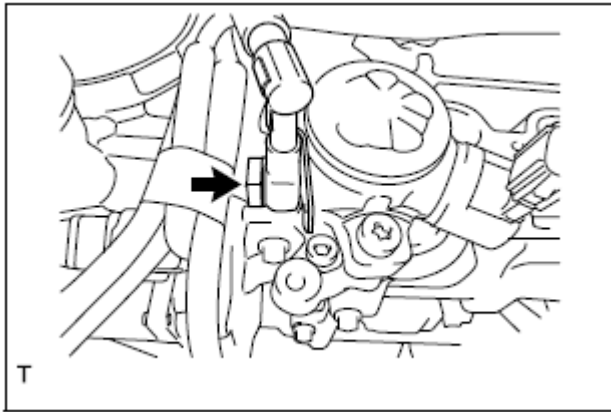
Identifying Fuel Delivery Pipe Sub-Assembly Union Bolts
